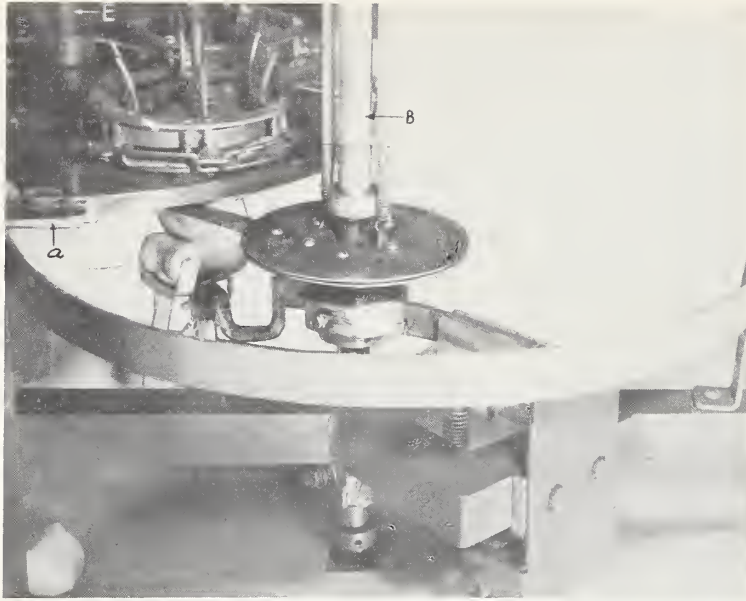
Transverse cut has just been completed. Note that knife mounting disk has been depressed by gaging mechanism, in this case three-quarters of an inch.
